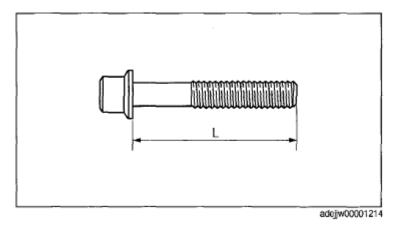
Identifying Connecting Rod Cap Bolt Measurement Length
